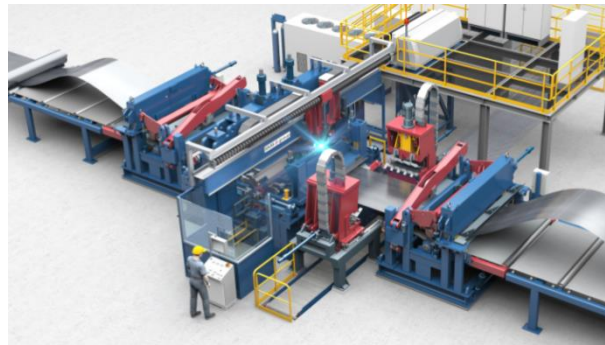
The X-Pro® laser welder allows an individual softening process which gives the weld seam the necessary ductility for further processing and makes it an ideal machine for welding of materials with high alloying contents.
